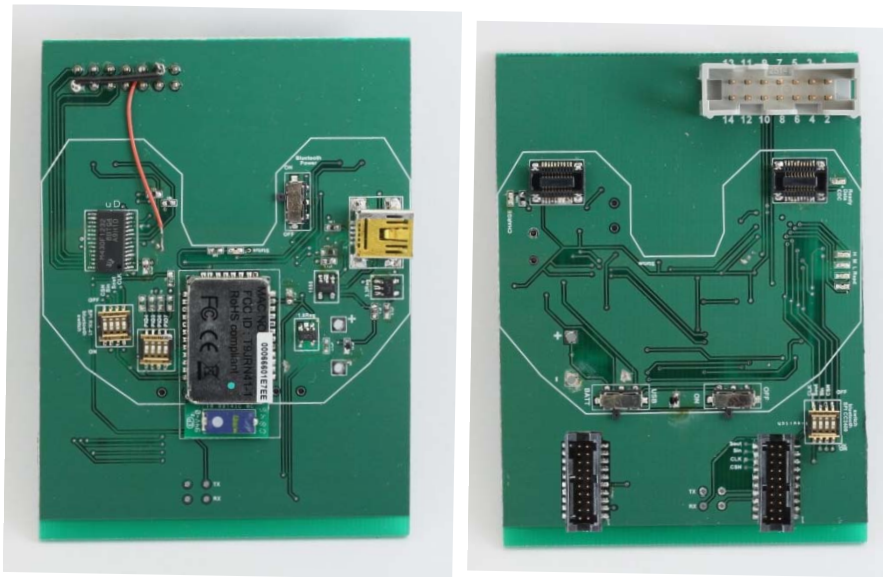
Final iteration of CDC readout board (bottom of stackable boards). This figure shows both sides of the bottom board, which uses a small, shielded Bluetooth module but still allows testing with the older TI CC2400 chip and large antenna.
